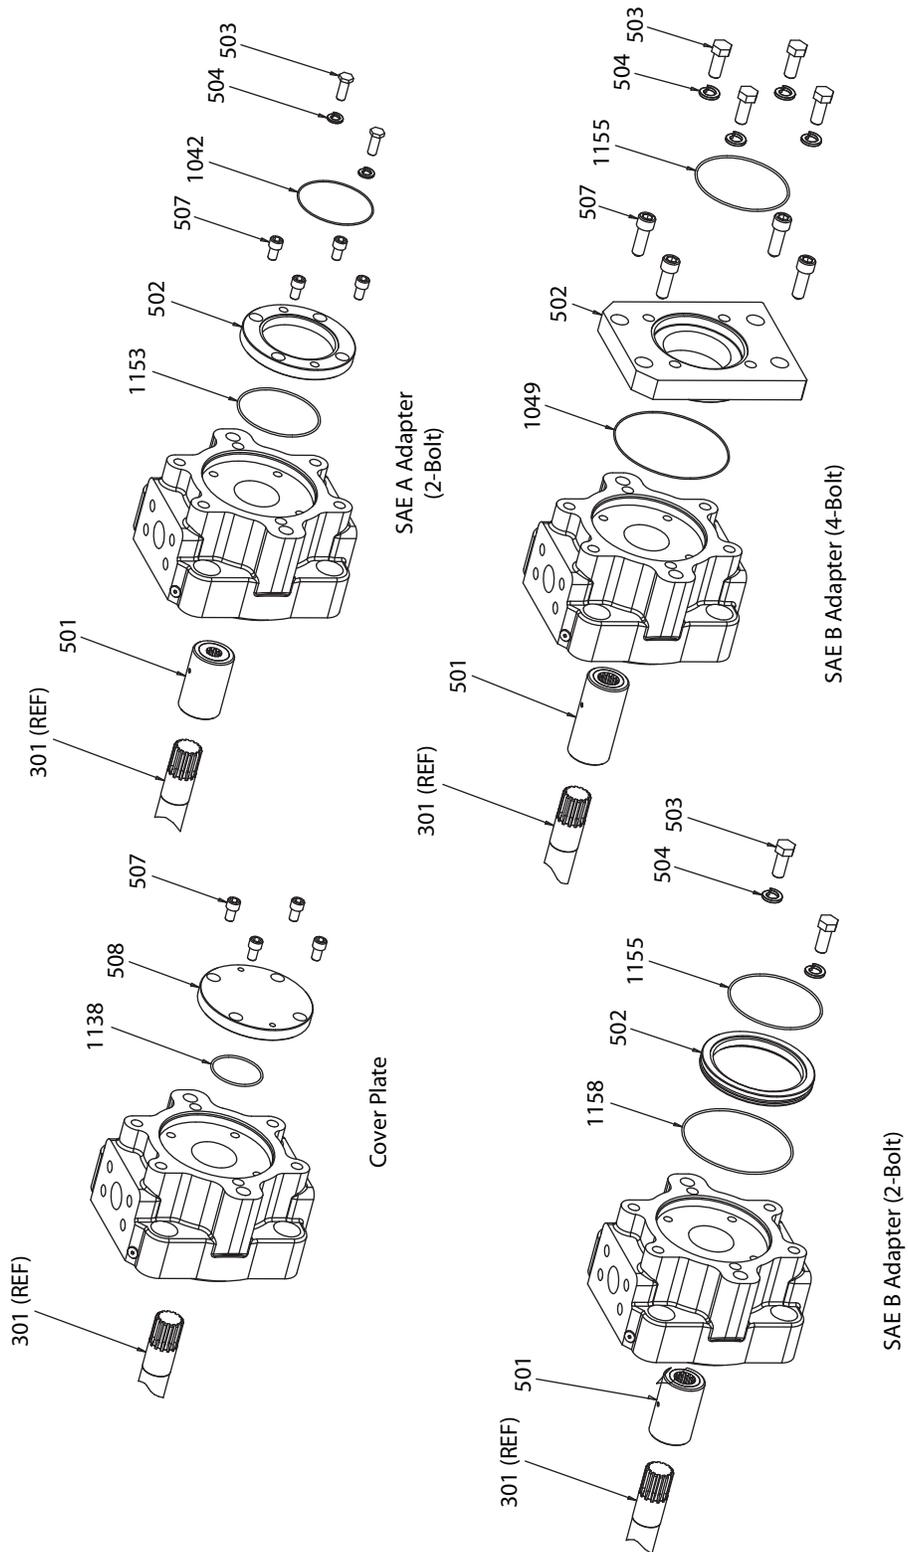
Exploded Parts Drawing for PVG 150 (520147-201 sheet 3 of 5)
